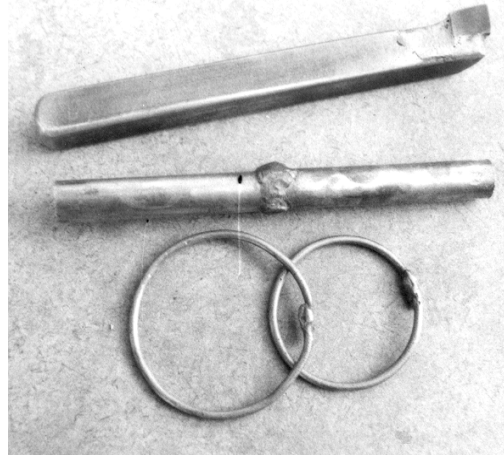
Simple examples of welding copper electrical wire and 12.5mm diameter copper tubing and an example of brazing a carbide cutter using the single carbon electrode.
